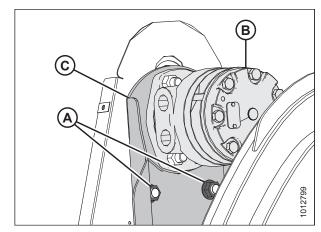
Single-Reel Drive Shown – Double-Reel Drive Similar
